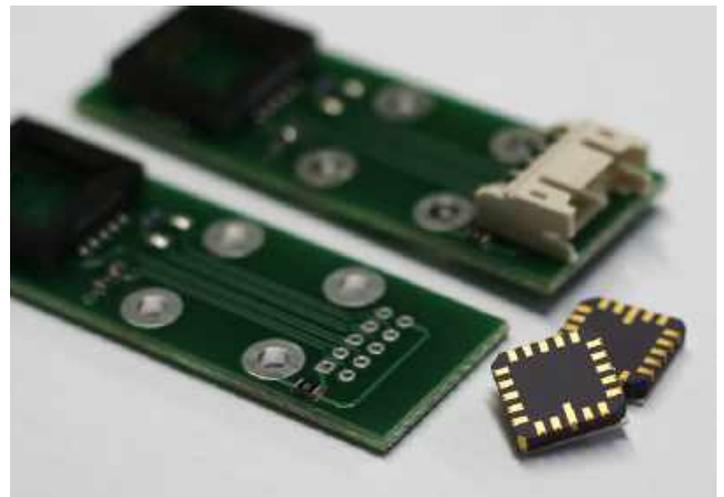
Paragraf GHS01AT sensors with PCB accessory (front board)
